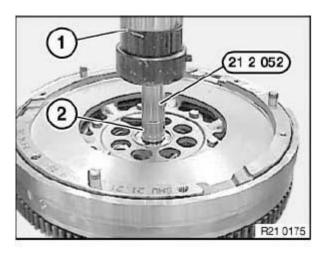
Identifying Special Tool (21 2 052), Roller Bearing And Hydraulic Press Courtesy of BMW OF NORTH AMERICA, INC.
